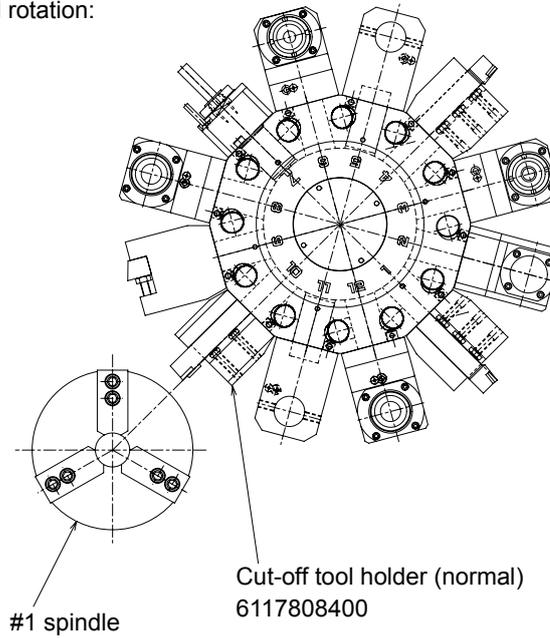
Power tool dimensional drawing (VDI turret: optional)
